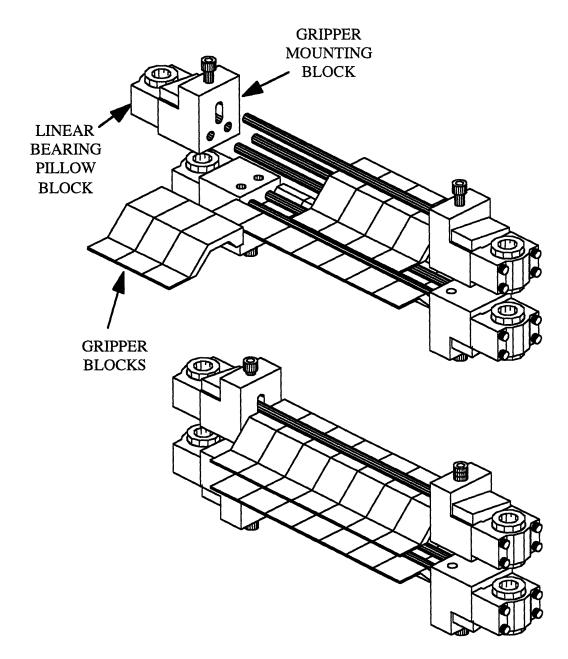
Gripper mounting block - linear bearing pillow block assembly.
